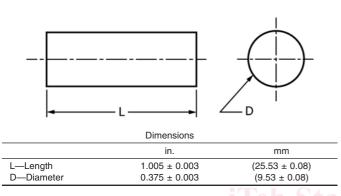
Machined PM Compressive Yield Strength Test Specimen
